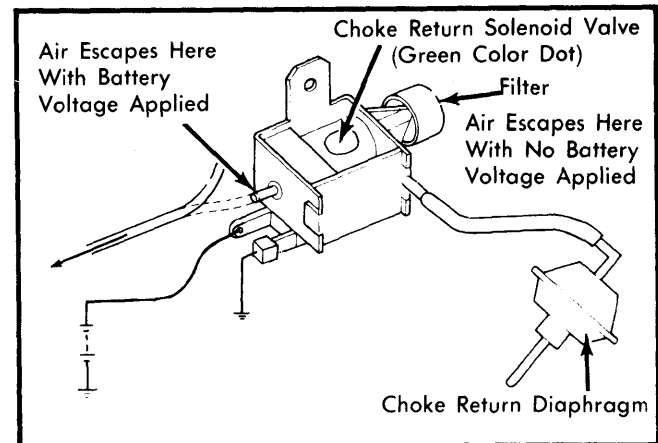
Testing Choke Return Solenoid Valve (Federal Models Only)
